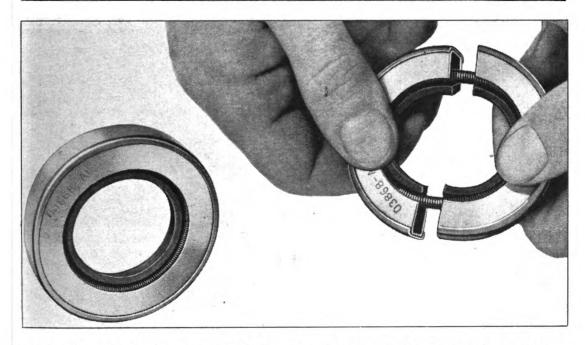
Detail of Oil Seal. At Left Complete Seal Ready for Installation with face Toward the Oil Pressure. Seal at Right Cut Open to Show Arrangement of Leather and Coiled Spring in Seal
